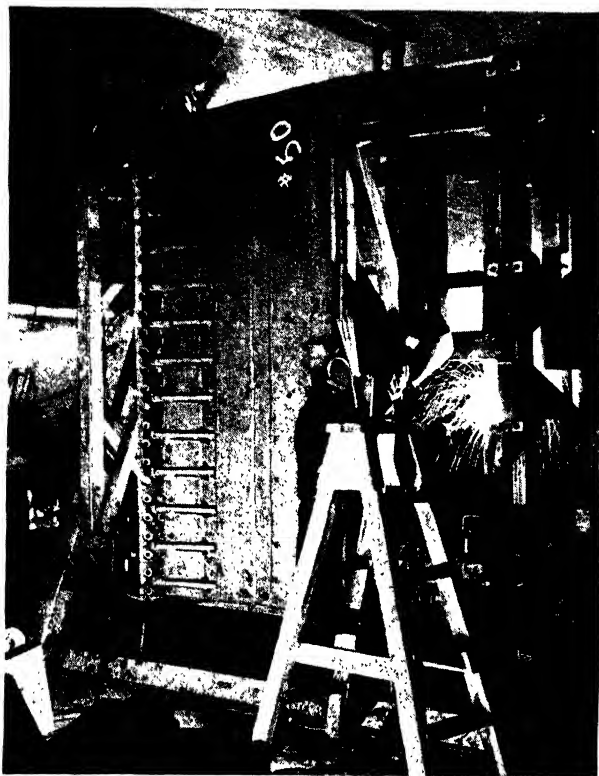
The relationships between the premachined and therefore important functional parts of this large earth-moving scraper body must be maintained accurately and positively. The machined surfaces of premachined parts fitting accurately to correctly placed stops on the setup fixture assure proper alignment without machining the whole structure. (*Courtesy of R. G. LeTourneau, Inc.*)
